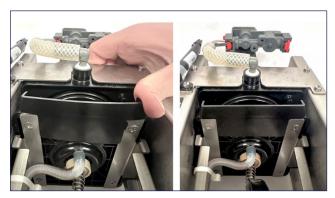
Note: Ensure that gutter is installed onto the BACK part of brew mech assembly.
